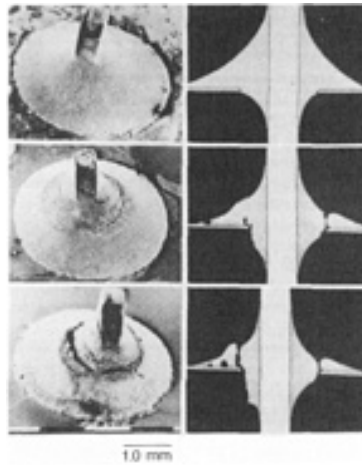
PROGRESSION OF FATIGUE DAMAGE IN A THROUGH-HOLE SOLDER JOINT (OPTICAL MICROSCOPY AND SEM). SOURCE: REF 7
